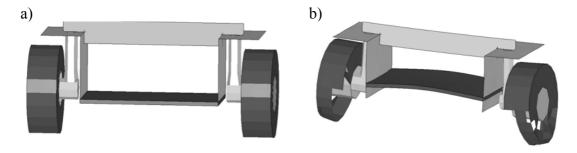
a) First protection proposal configuration; b) Vehicle condition after some milliseconds: it can be appreciated how the welds have failed and the bottom plate moves upwards.
